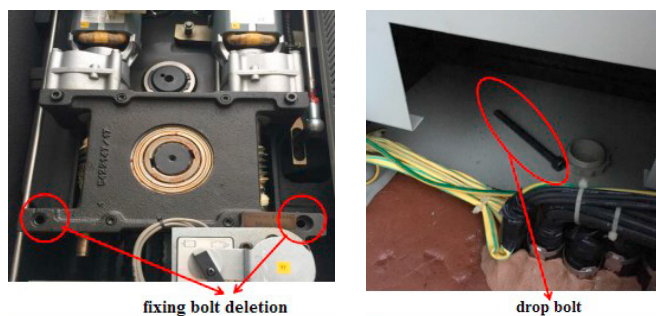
(a) A circuit breaker electrical energy storage module; (b) Drop bolt of a breaker mechanism.
